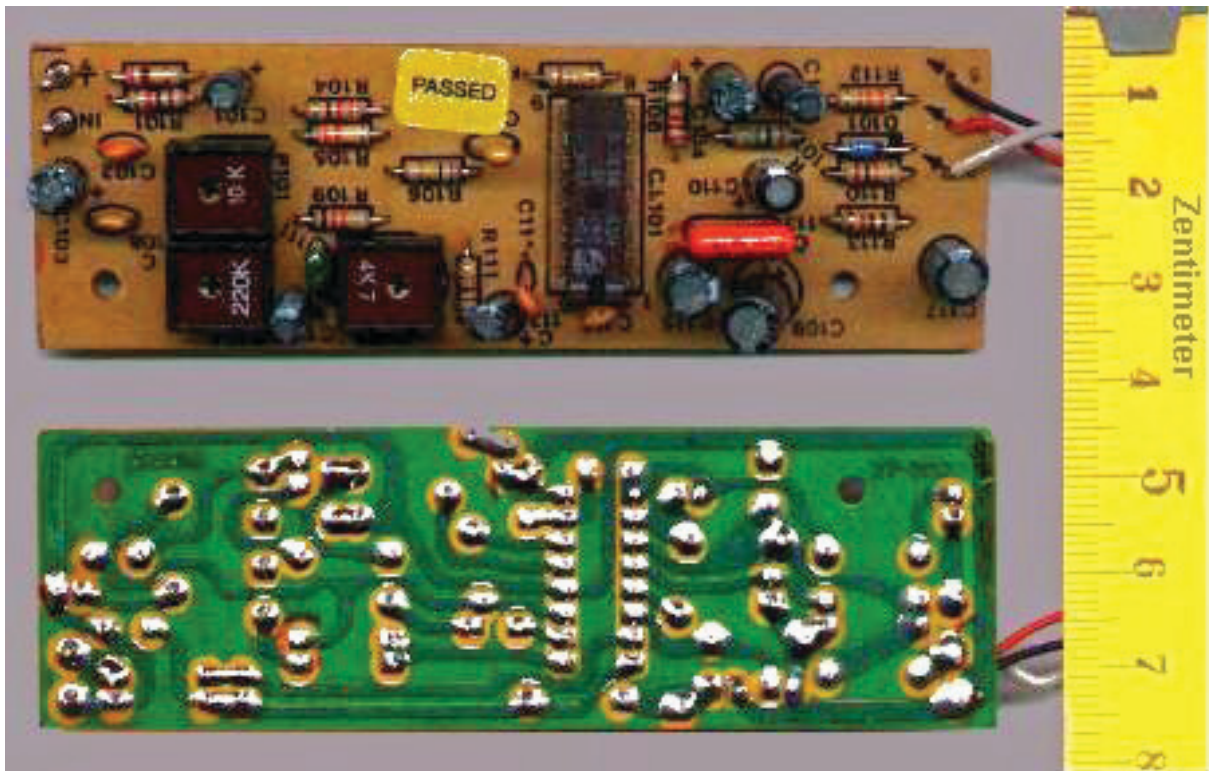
A single layer printed circuit board with traces and solder connections on one side and the soldered components on the other side.
